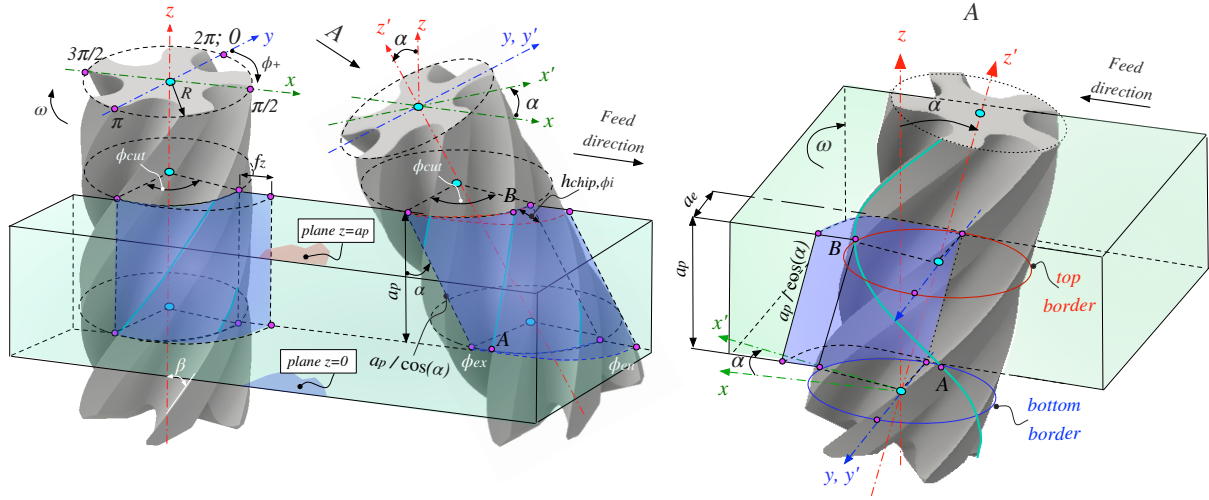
Schematic representation of the differences between the non-tilted and tilted milling: a_p - axial cutting depth; a_e - radial cutting depth; ϕ_{en} - edge enter angle; ϕ_{ex} - edge exit angle; ϕ_{cut} - tool engagement angle; α - tilting angle; AB - instantaneous engagement length of the acting edge; (x, y, z) - coordinate system in the workpiece reference frame; (x', y', z') - coordinate system in the tool reference frame; f_z - feed per tooth; h_{chip, ϕ_i} - instantaneous chip thickness; ω - tool rotation direction; ϕ - tool angular position
